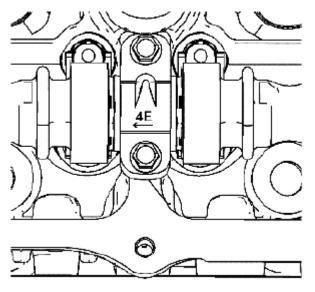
Identifying Markings On Left Cylinder Head Camshaft Bearing Caps Courtesy of SUZUKI OF AMERICA CORP.
